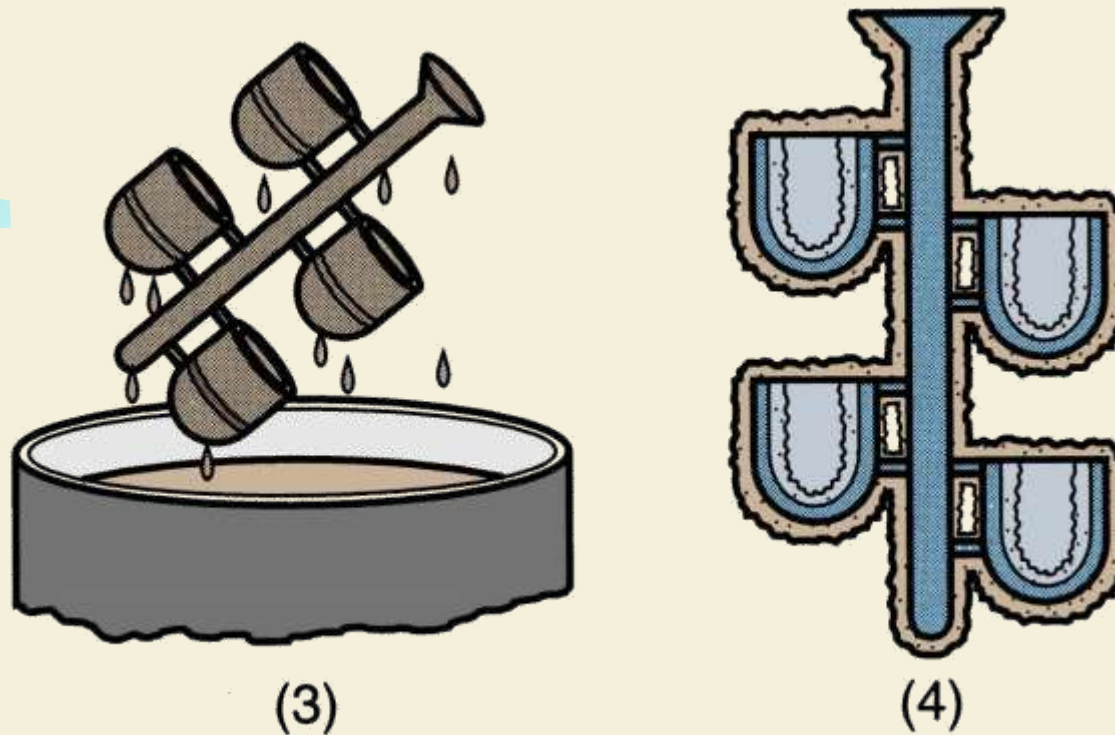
Steps in investment casting: (3) the pattern tree is coated with a thin layer of refractory material, (4) the full mold is formed by covering the coated tree with sufficient refractory material to make it rigid
